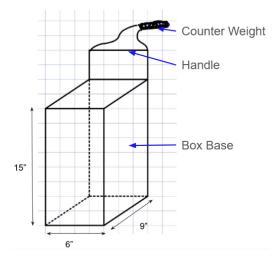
Front view of design two showcasing its solid box base, single support handle, and counterweight.
